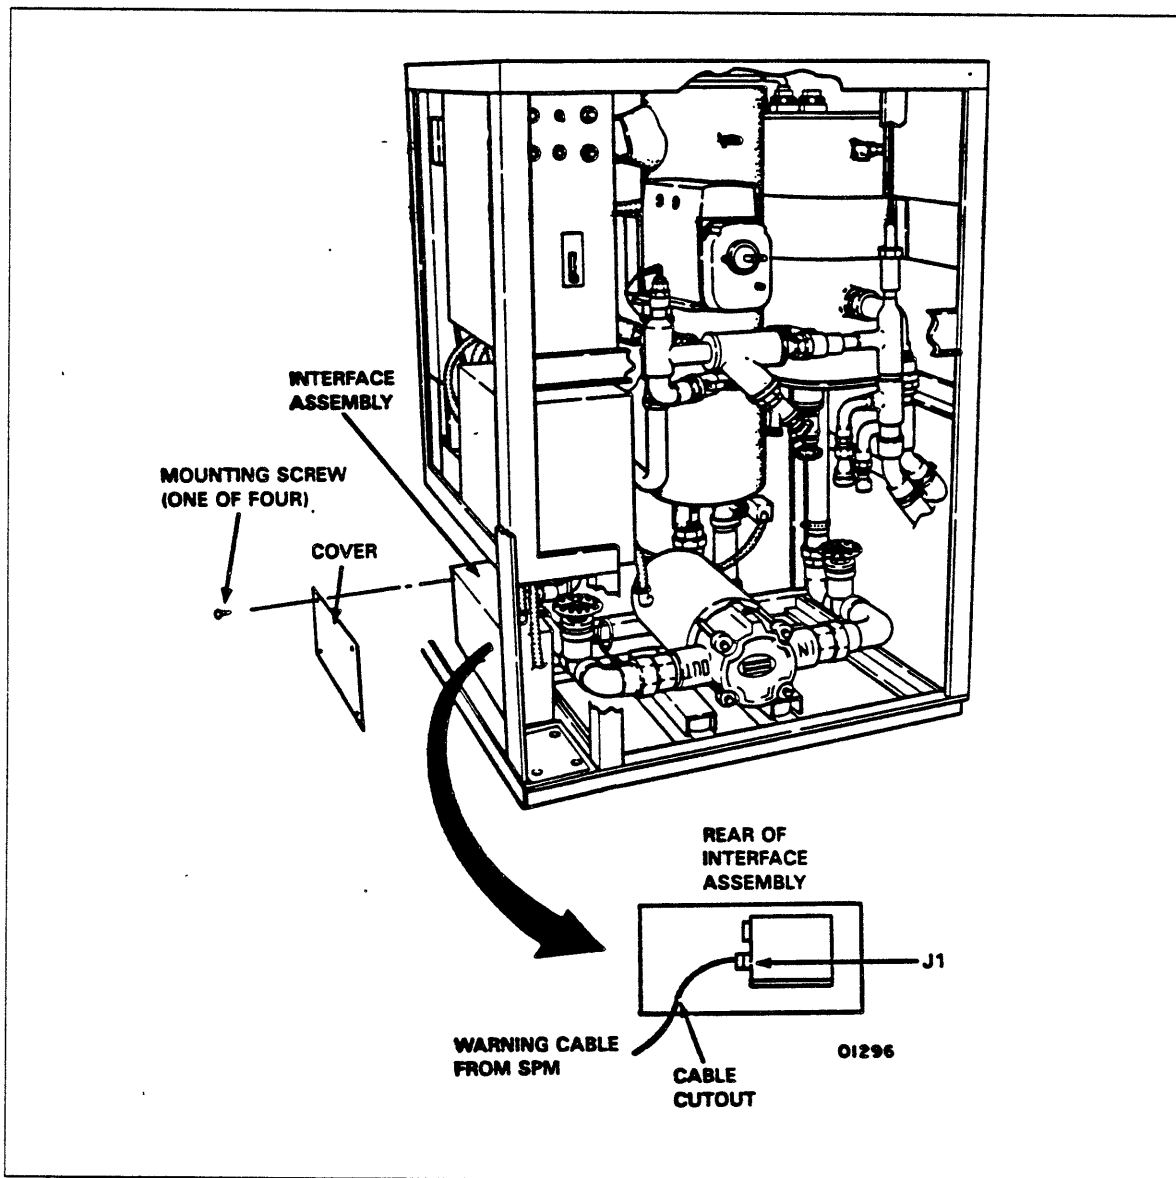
SPM Cable Connections to GH251-A Water Cooling Unit
